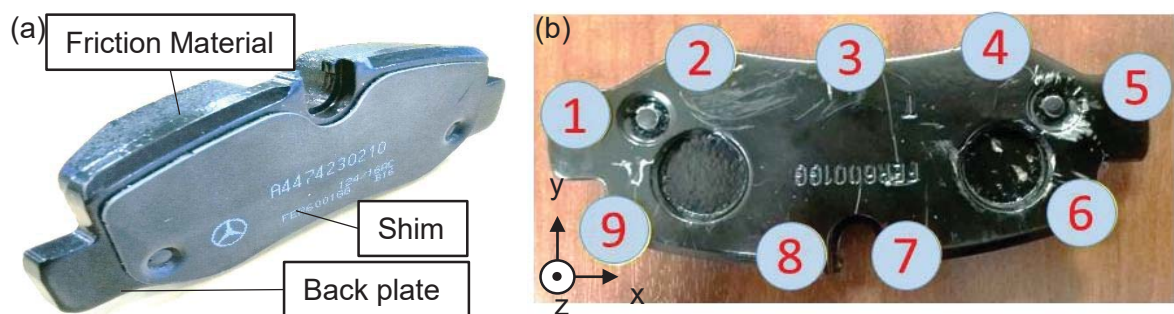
a) The brake pad and b) The measurement points on the back plate
